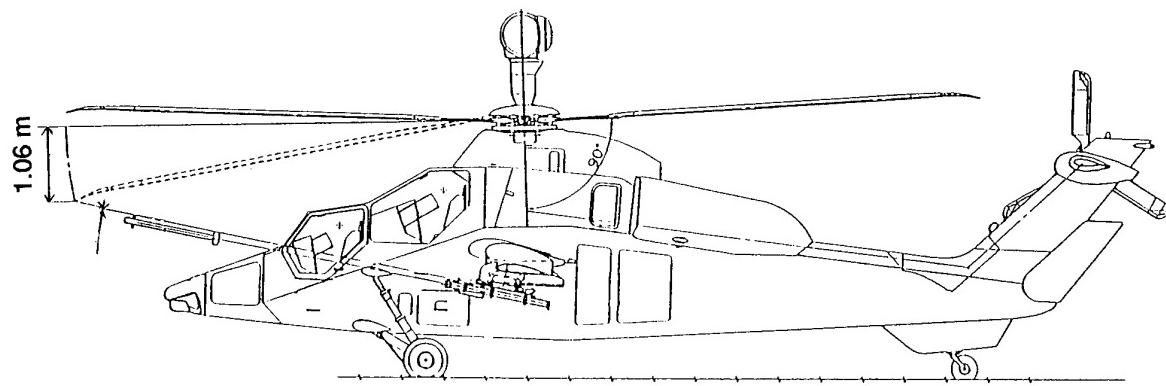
Main rotor blade and missile flight path clearance check study
